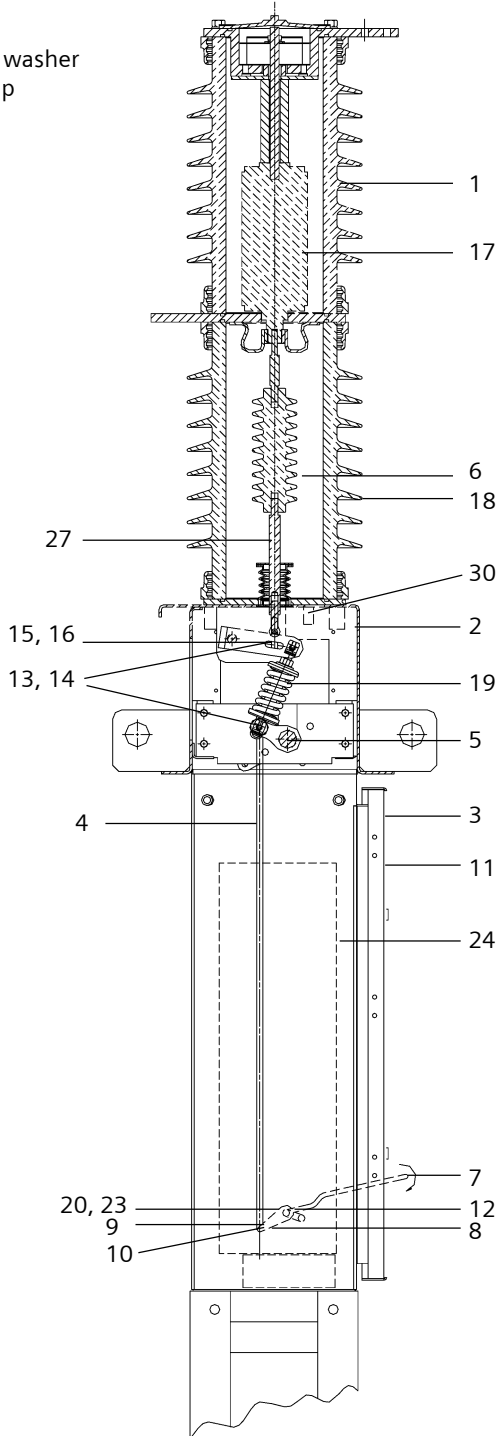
Cross section of interrupter assembly, base frame and operating mechanism
